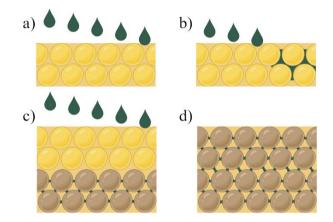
Components of additive manufacturing system (printing) for moulds in binder jetting 3D system [1, 3]
